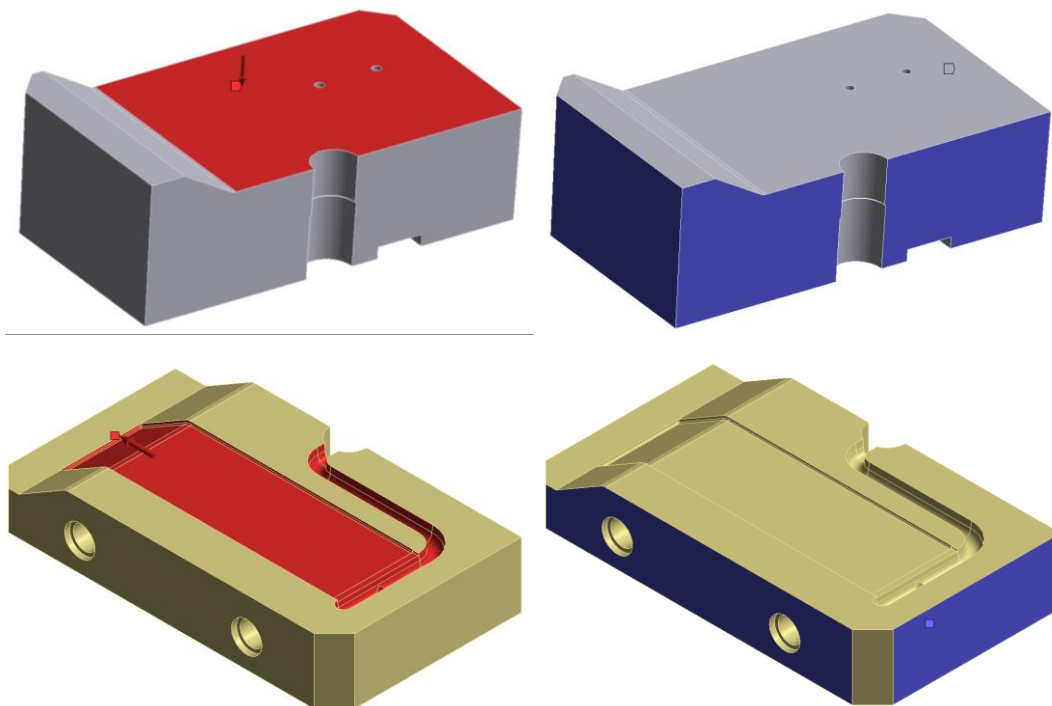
Pressure applied on the injection moulding inserts (left) and fixed faces (right).
